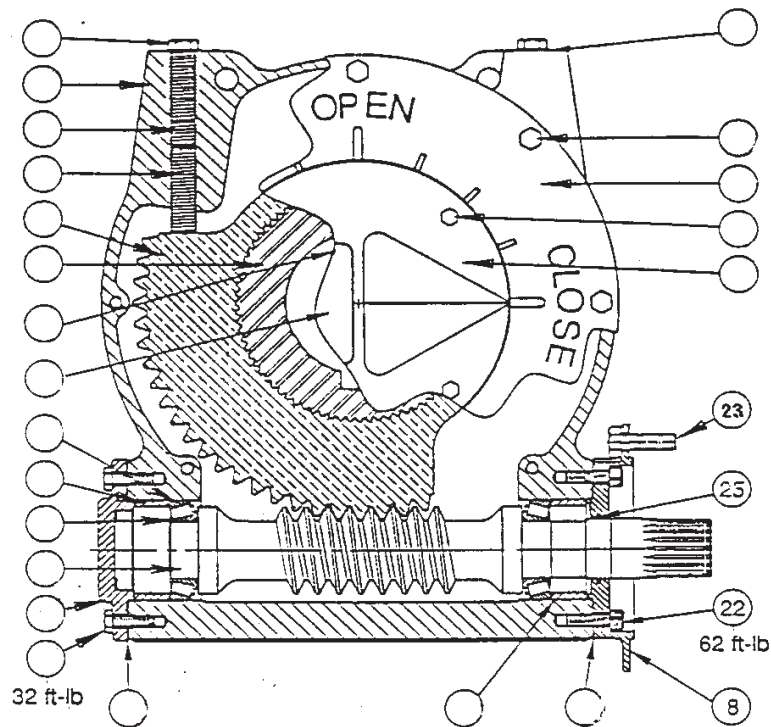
Assembly WG65 972:1 16" (DWG 83841 Rev. C)
